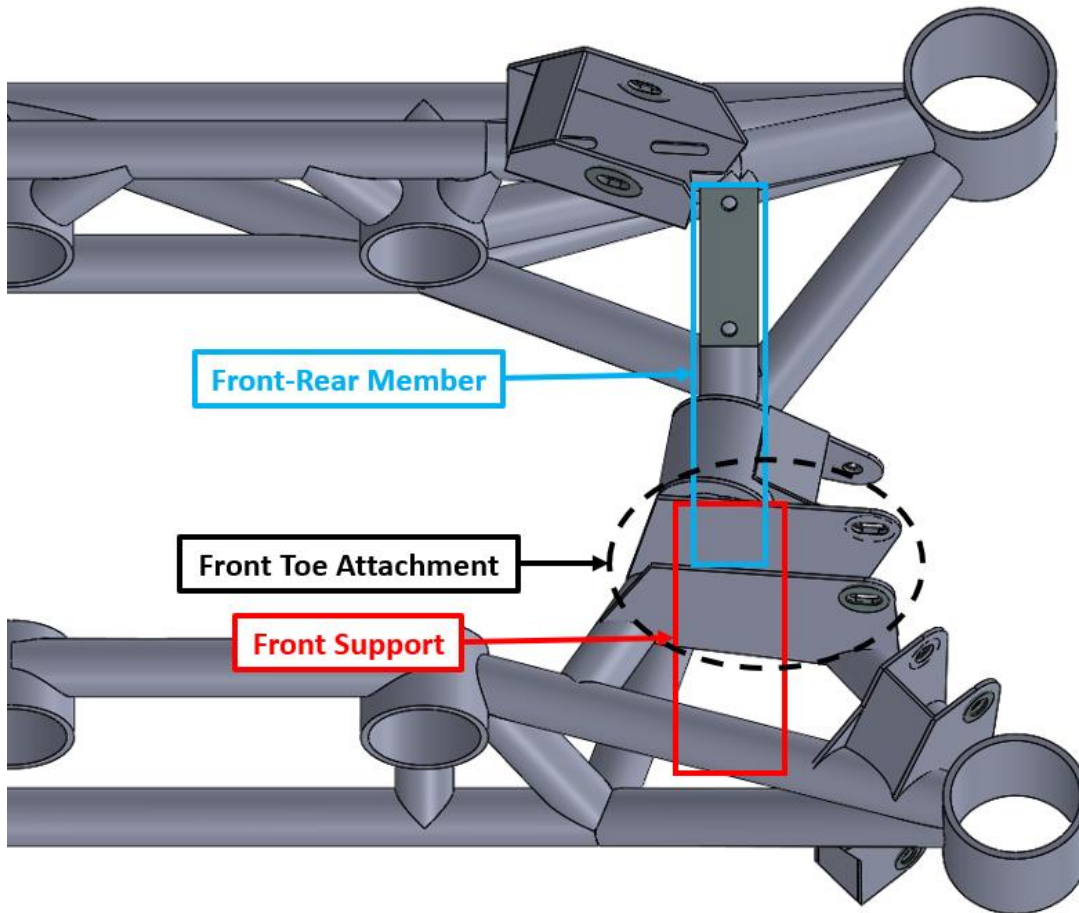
Front-Rear Member Layout, with front-rear member in blue, front support in red, and the attachment point circled in black
